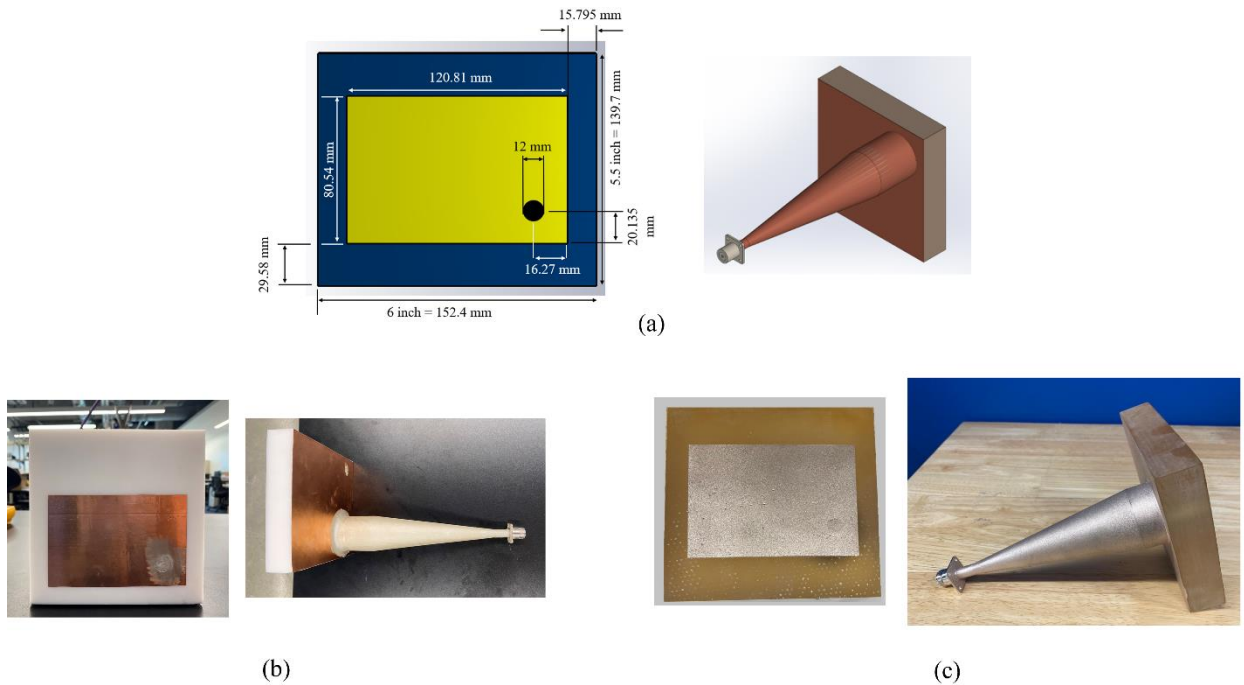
Front and side views of the improved SLA patch antenna with tapered, coaxial, feed: (a) CAD model, (b) manufactured prototype – v1, and (c) manufactured prototype – v2 (improved).
